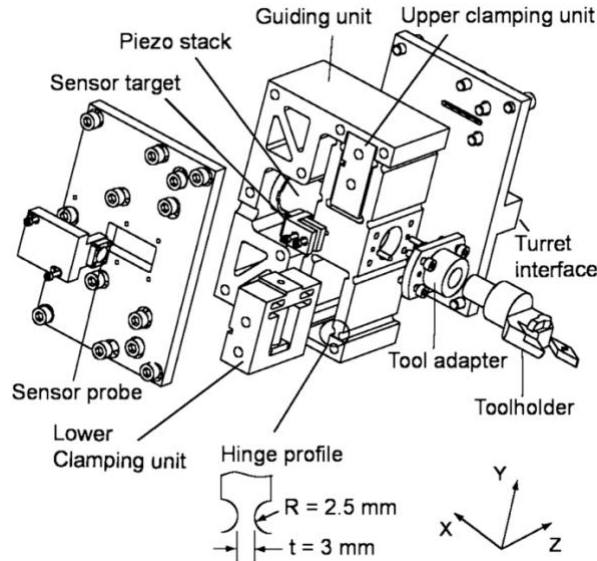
Exploded view of the piezo actuator assembly [24, 36].
